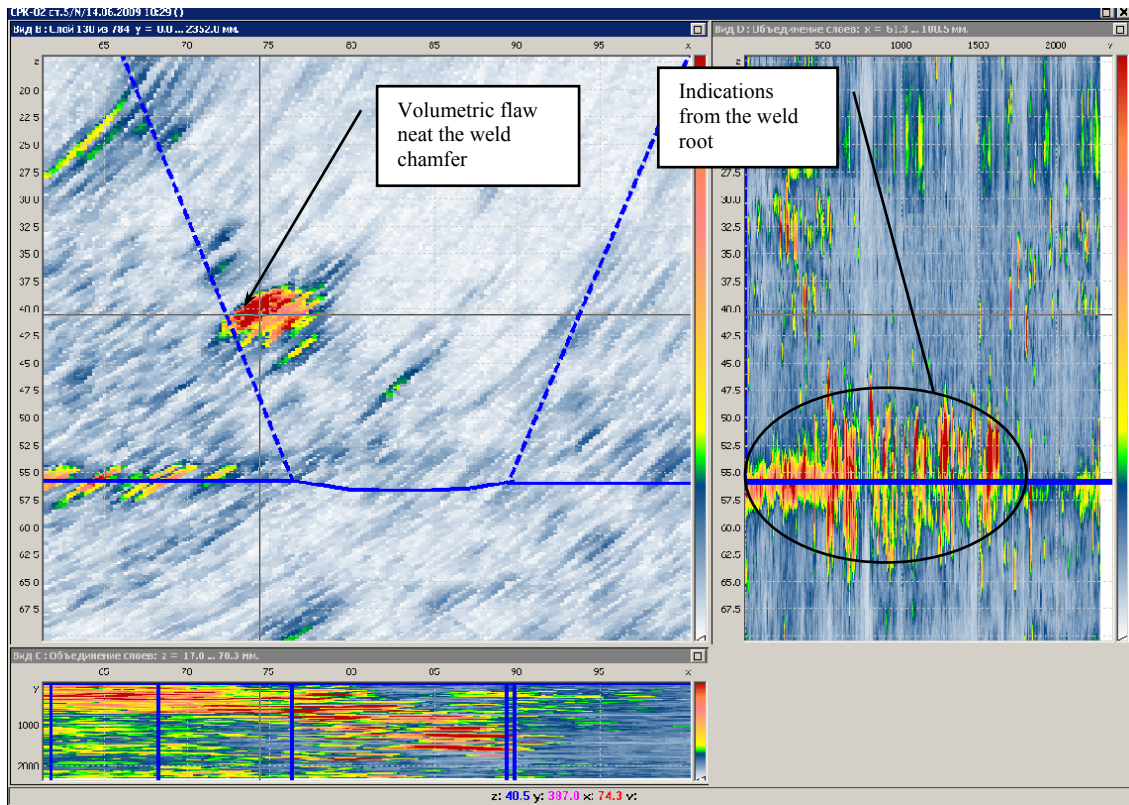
Du700 weld inspection with PA. The volumetric flaw and small indications was detected.
